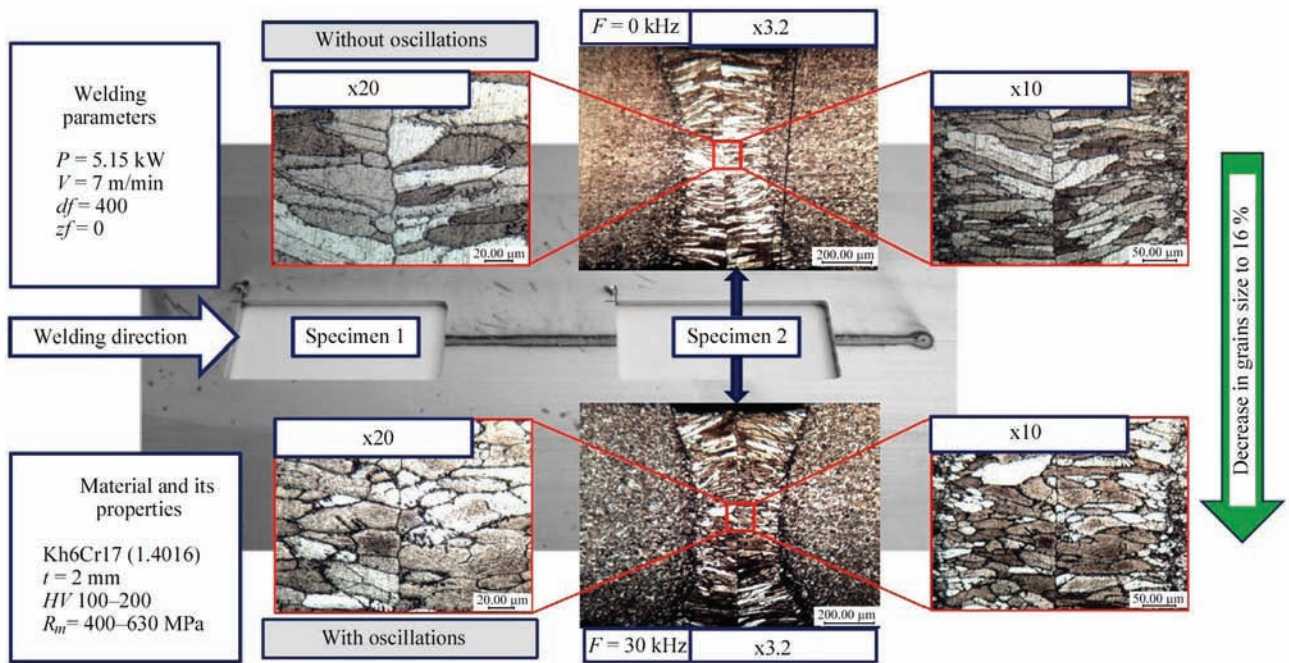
Microstructure of welds after laser welding without and with additional mechanical oscillations generated by piezo shaker
